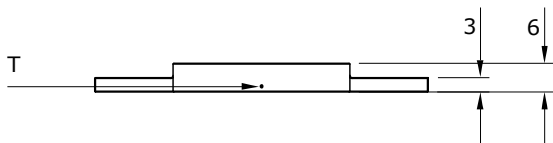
IHF01 dimensions in $\times 10^{-3}$ m. T marks the location of the thermocouple.
